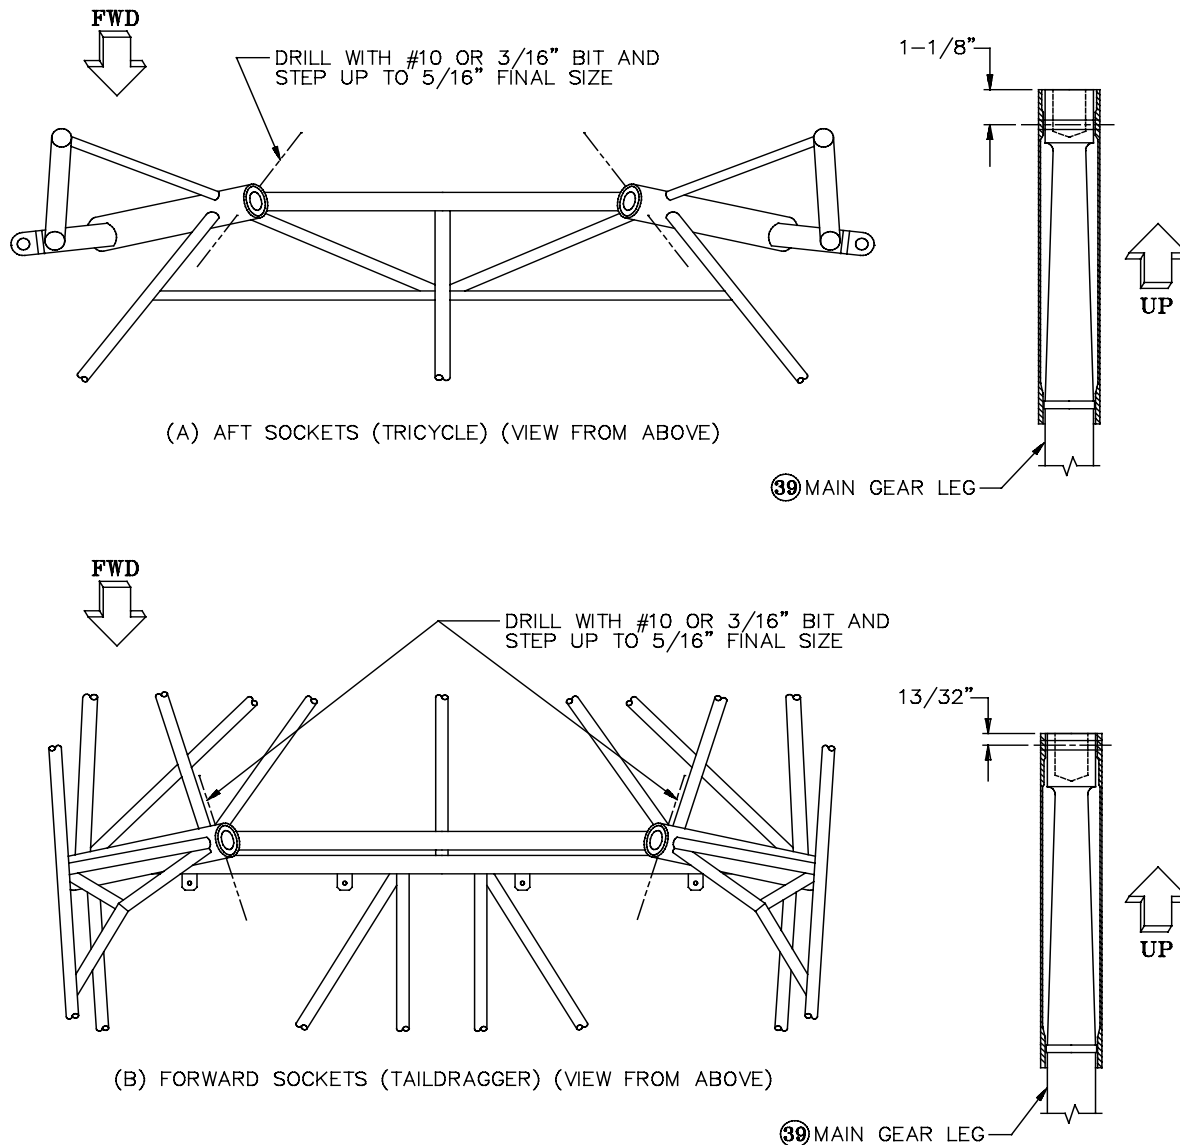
Drilling Angles for the Main Gear Leg Bolts
